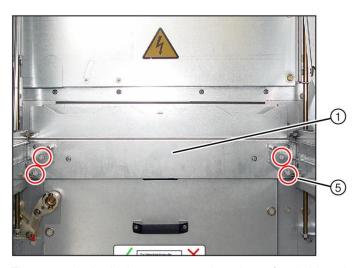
4 bolted joints on protection plate of switching-device compartment
